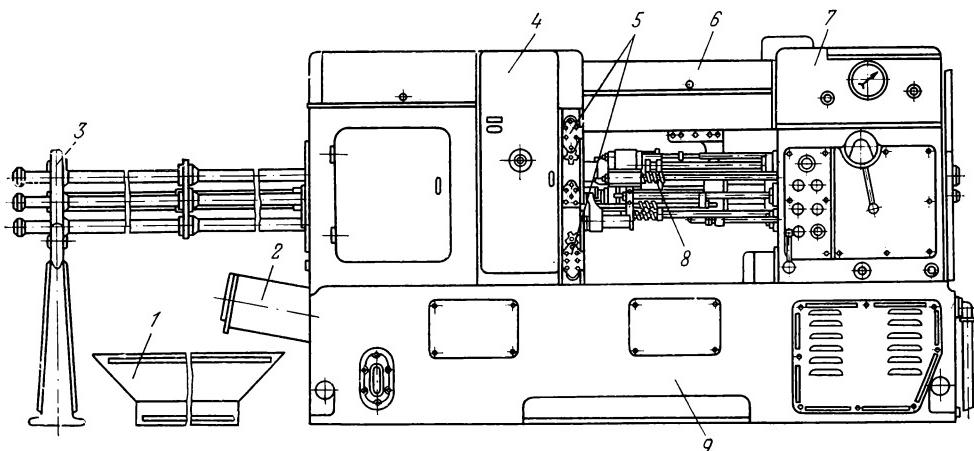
Six-spindle automatic bar machine, model 1A225:
